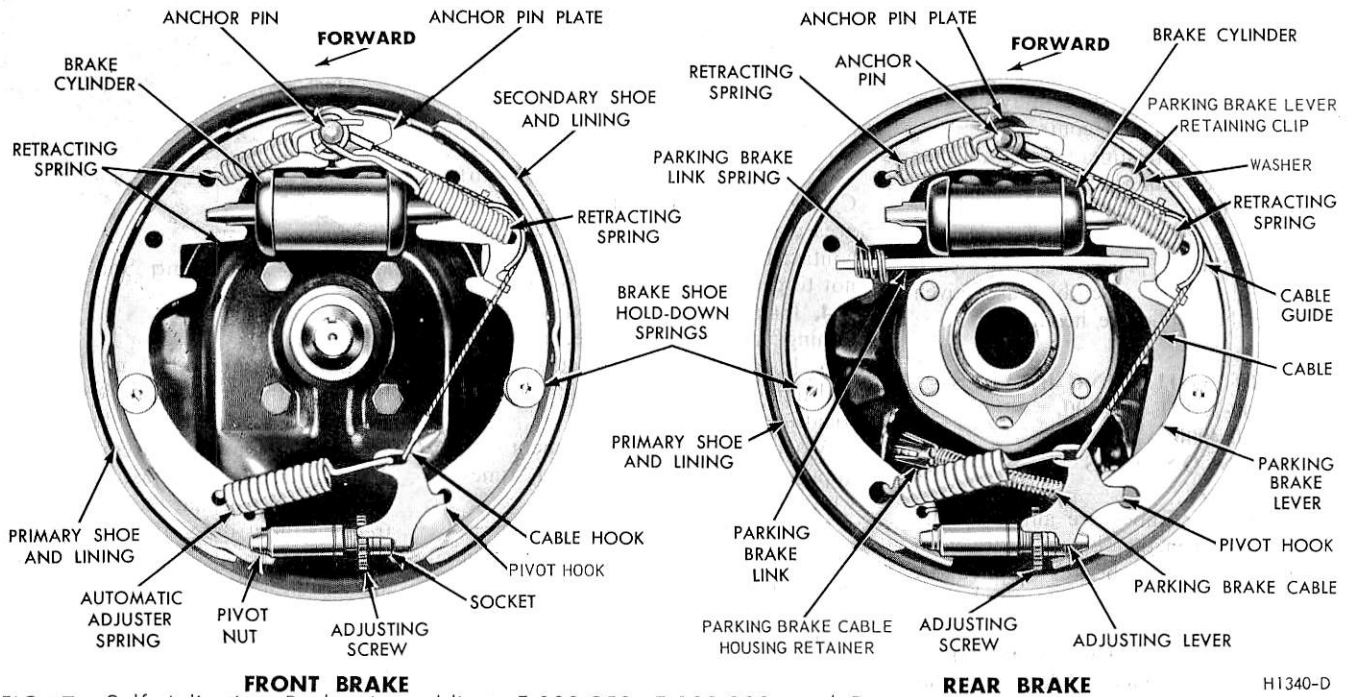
Self Adjusting Brake Assemblies—F-100-250, E-100-200, and Bronco
